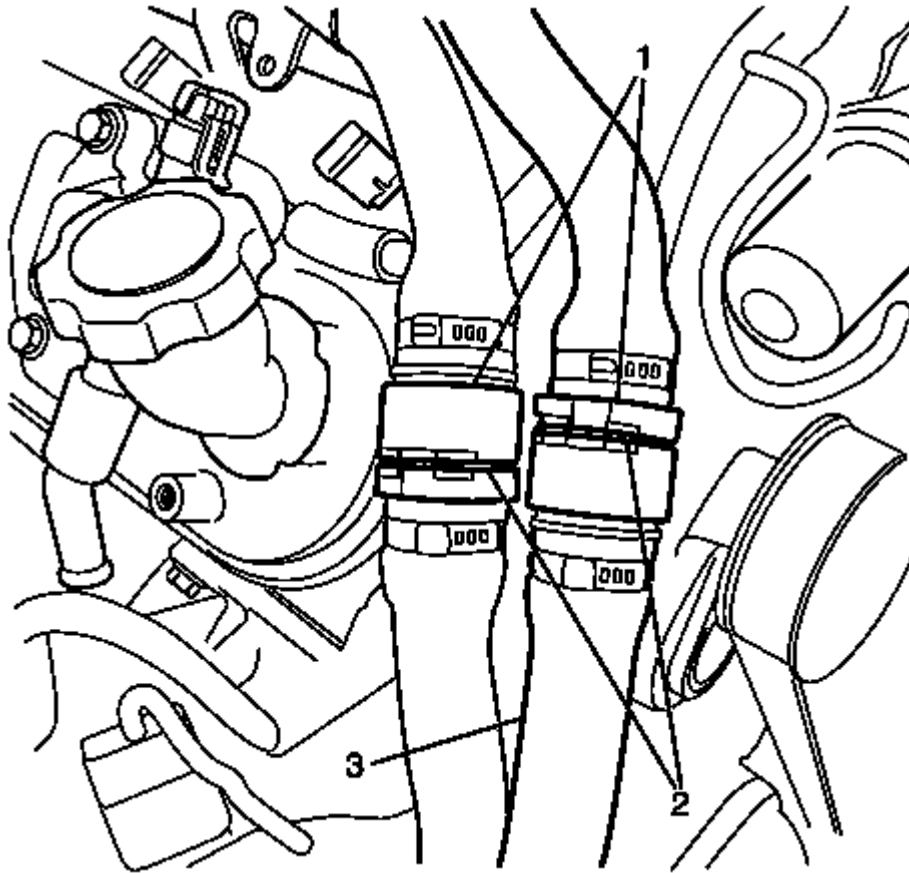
Identifying Heater Hose Assembly Quick Connect Fittings & Retaining Clips
